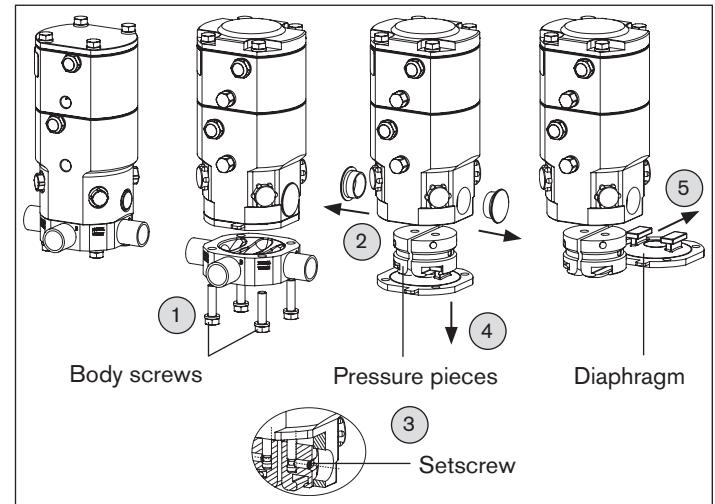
Disassembly of the RV50, RV70 pneumatic actuators
